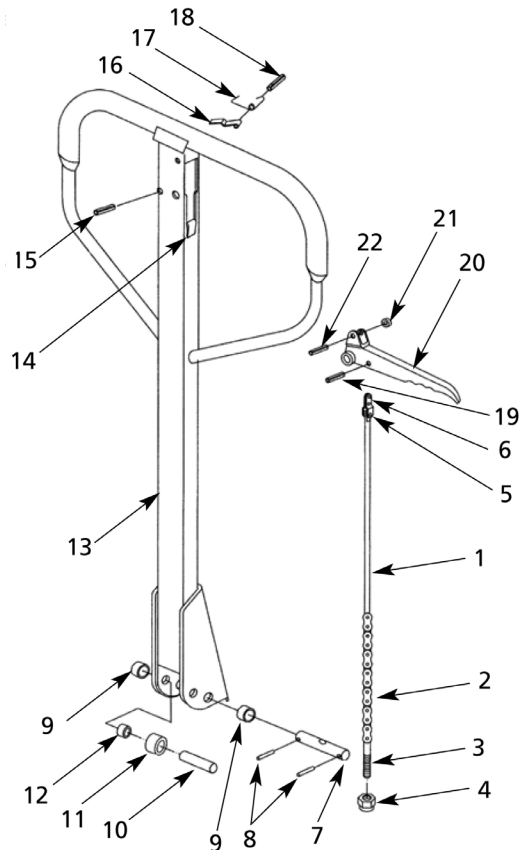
Repair Parts Illustration for Pallet Truck Handle
